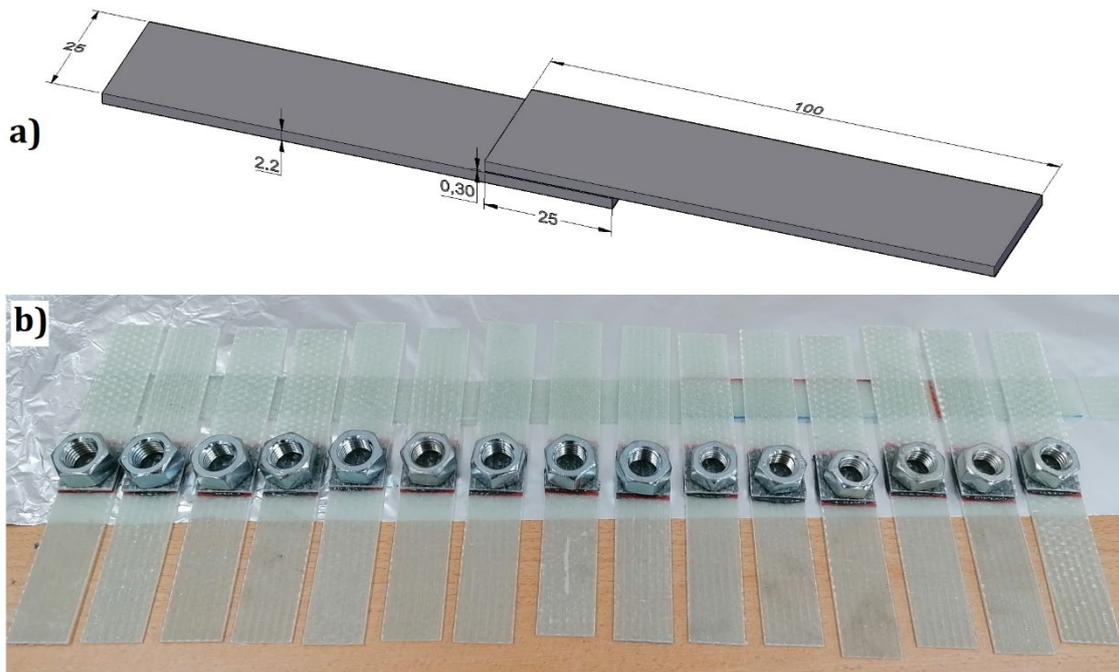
a) The dimensions of adhesively bonded single lap joints specimens, b) prepared samples
